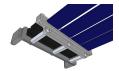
MET-BEZEL-IO146-LOCK Bottom View
